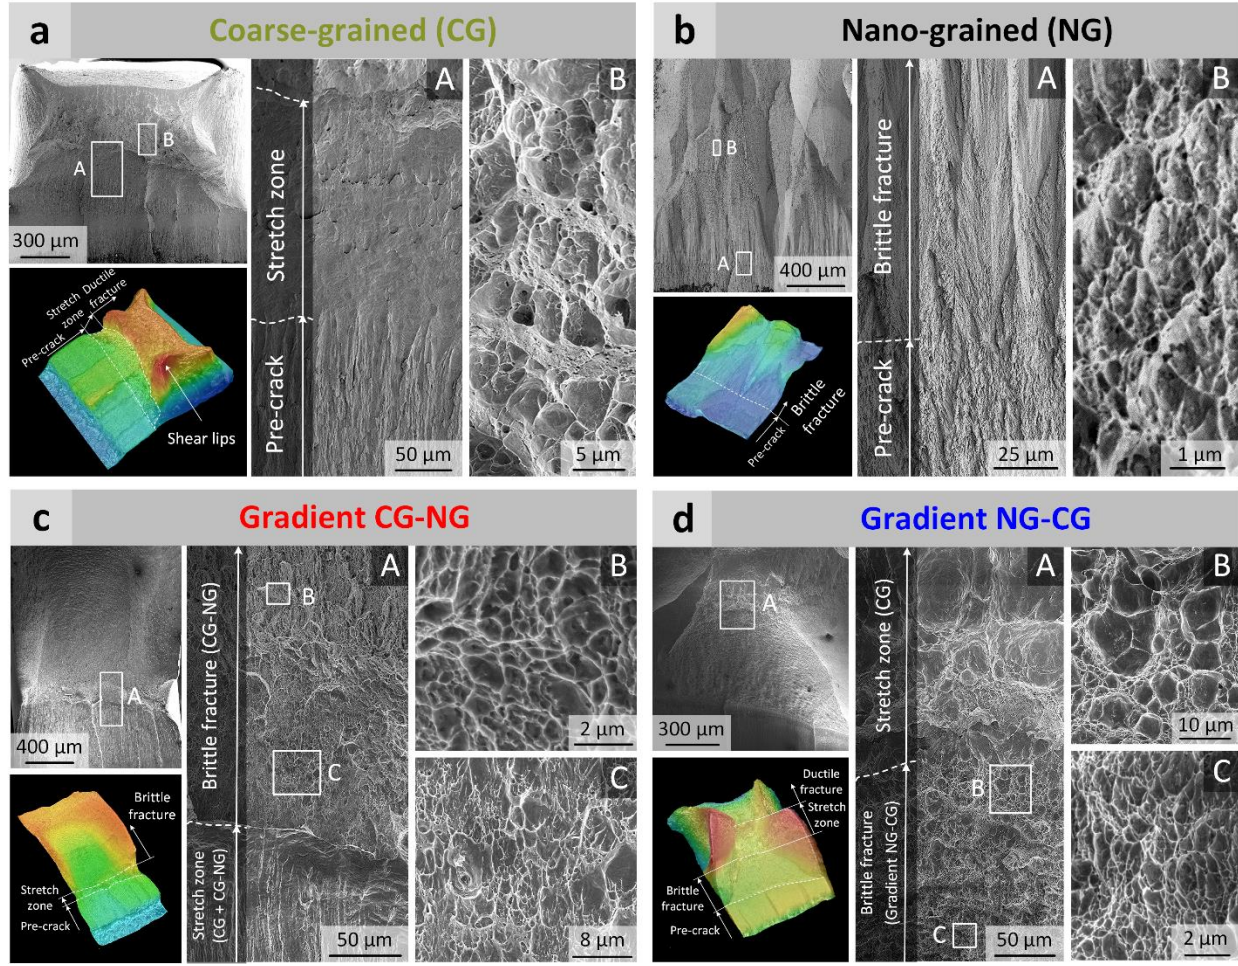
Fractographic features examined on the separated fracture surfaces for the *in situ* SEM tested GS and MS Ni specimens. (a) CG fracture surface shows a transition from the pre-crack to a tearing stretch zone followed by full ductile fracture surface composed by ductile dimples. (b) NG fracture surface shows typical brittle feature in macroscopic appearance, where irregular-shaped flat surfaces are connected at “dividing” ridges, forming “river patterns” along the crack propagation direction. (c) A mixture of ductile and brittle features is shown in CG→NG fracture surface. After a short stretch zone within the CG zone at crack initiation, brittle fracture surfaces are followed in the gradient CG→NG zone and extend further into the NG zone. (d) The NG→CG fracture surface presents a mixture of brittle and ductile features similar to the CG→NG case yet in a reverse order. Brittle fracture surfaces are first formed at crack initiation in the pure NG zone and extend into the gradient NG→CG zone. As crack grows further into the CG zone, pronounced stretch zone and full ductile fracture surfaces are developed.
